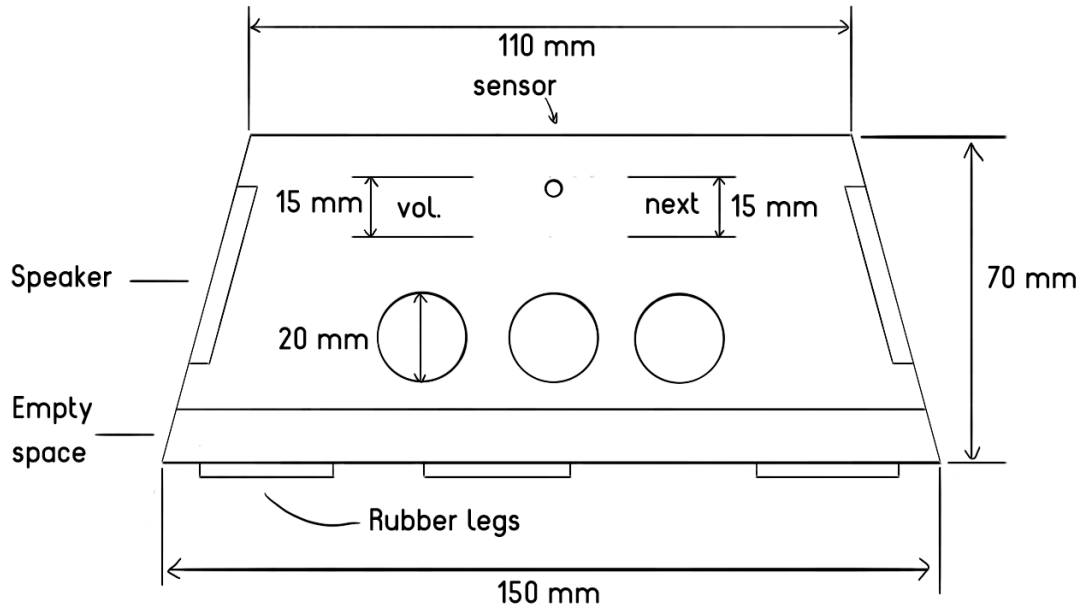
Rough dimensions of the chosen design. These dimensions belong to the hub.
